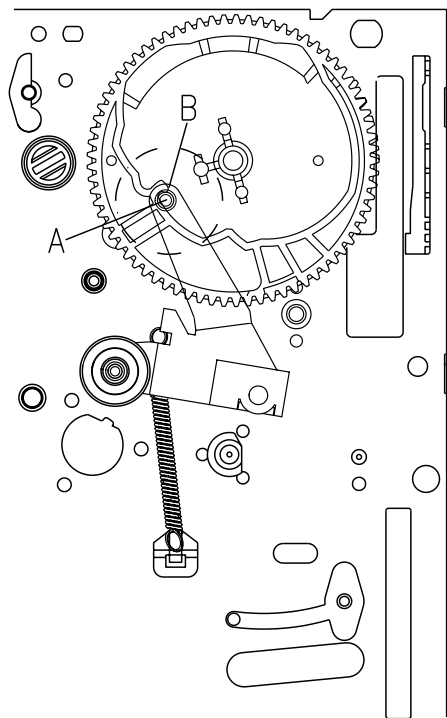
DATUM POSITION OF PINCH LEVER TOTAL ASS'Y & CAM GEAR
